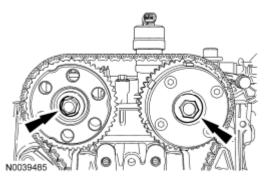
Identifying Camshafts Sprocket Bolts Courtesy of FORD MOTOR CO.
